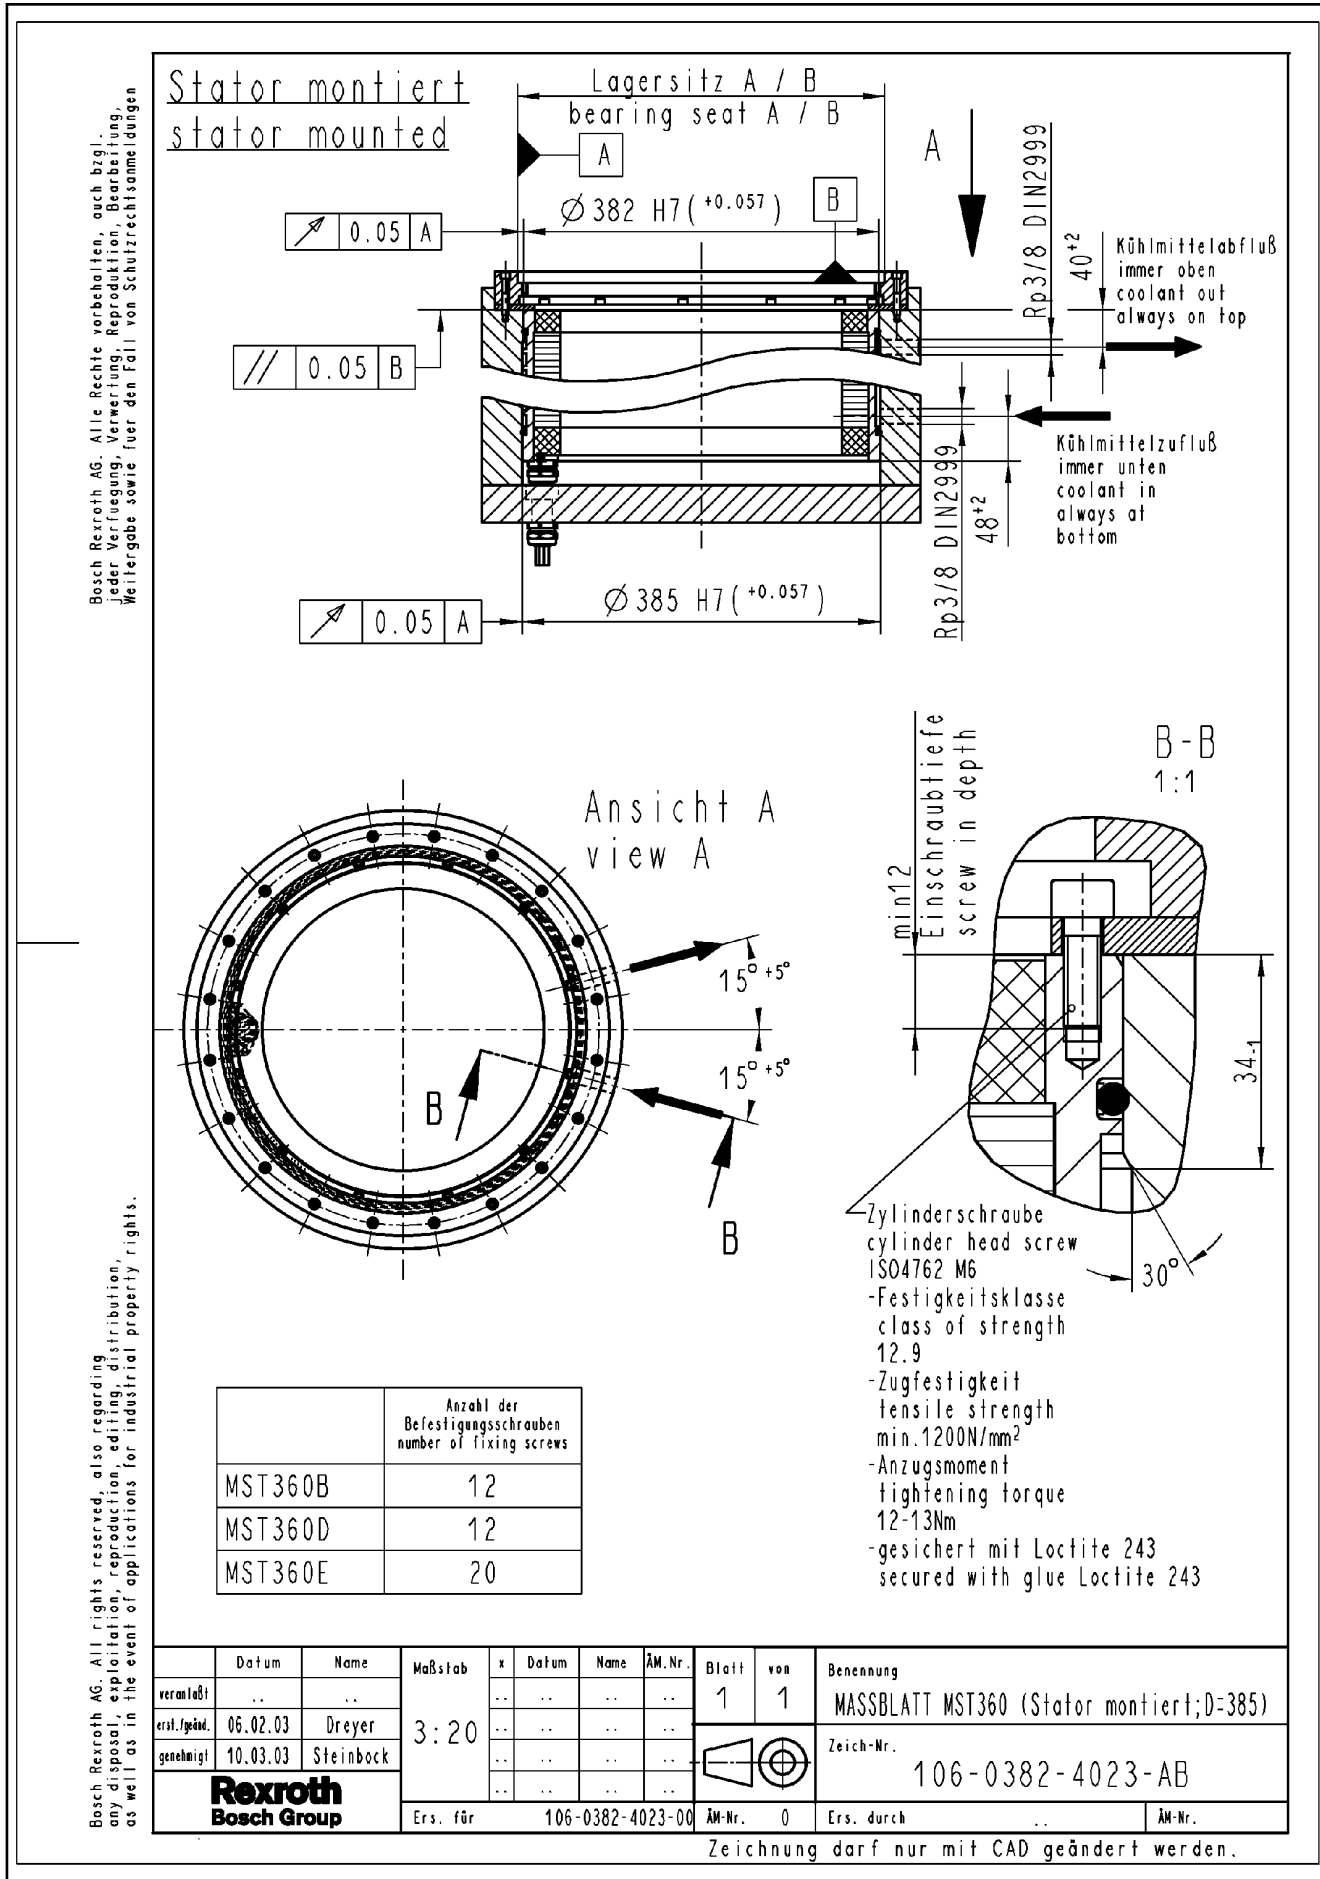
Dimension sheet MST360 mounted, electrical connection "CN"
